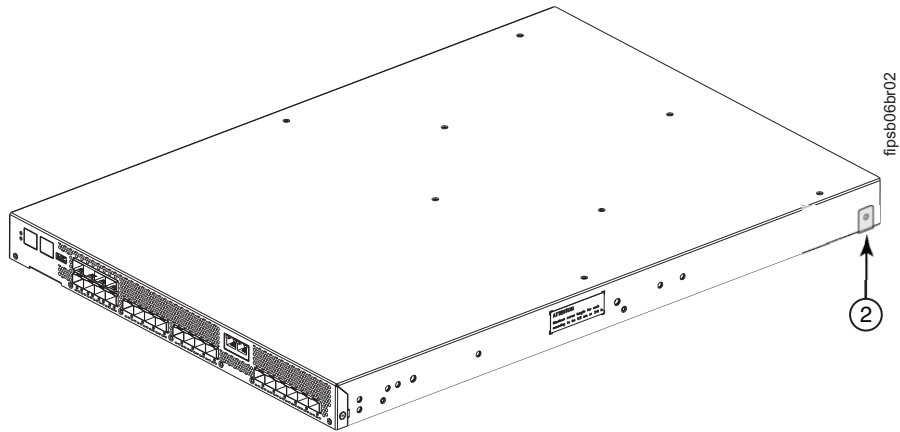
2498-R06 switch top and right port side view with FIPS seal applied
